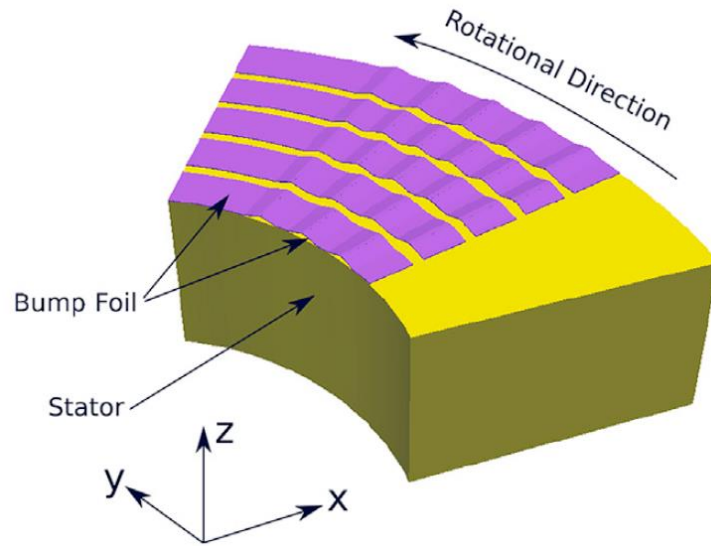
Schematics of a single-pad bump-type foil thrust bearing in Ref. [44].
